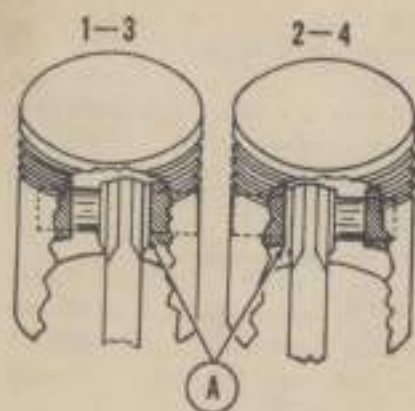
D-17 non-diesel piston pins are of the locked-in rod type. Numbers 1 and 3 units are assembled as shown at the left. Numbers 2 and 4 units are assembled as shown at the right.
